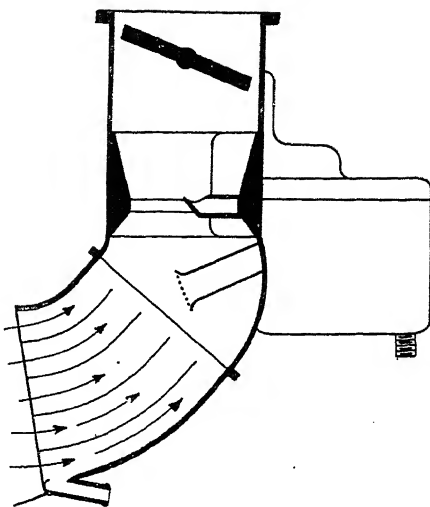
STRAIGHTENER VANES IN CARBURETTER AIR INTAKE.
